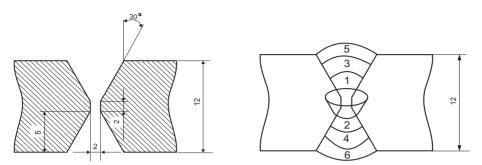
Position and processing of the plates (left), scheme of the welded joint (right)
